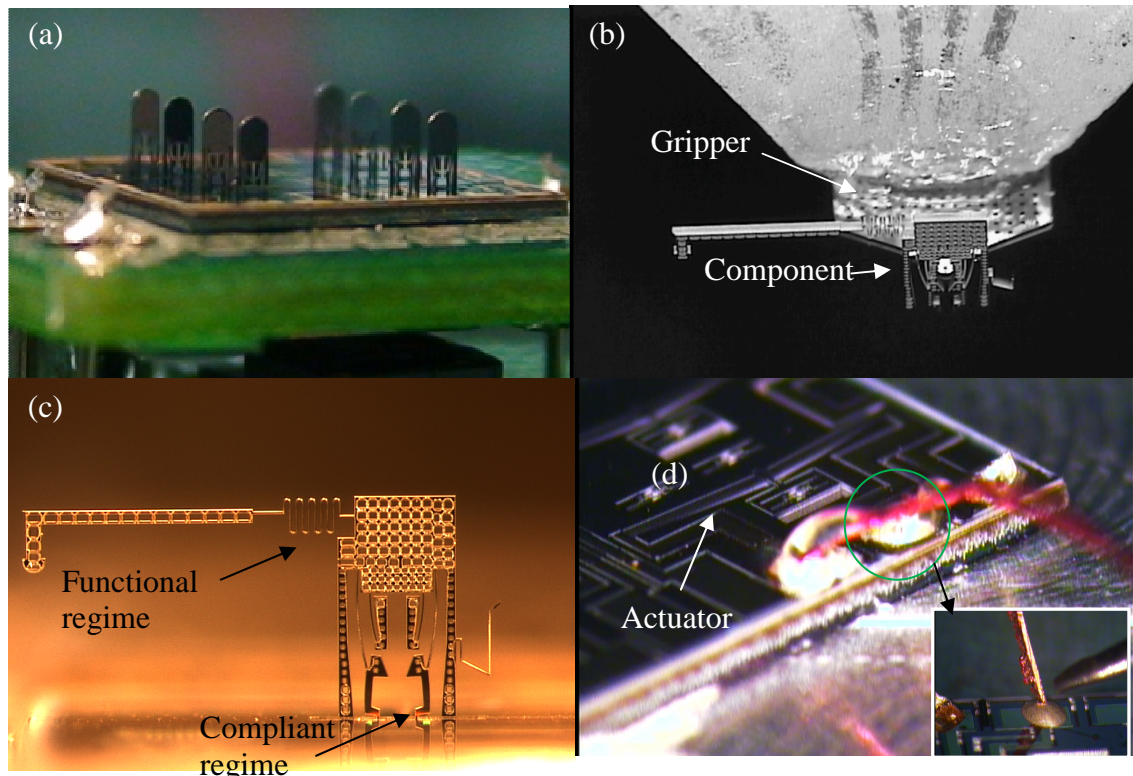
Microrobot design examples (a) Multiple assembly instances; (b) Component with passive gripper; (c) Assembled component; (d) Electrical interconnect
